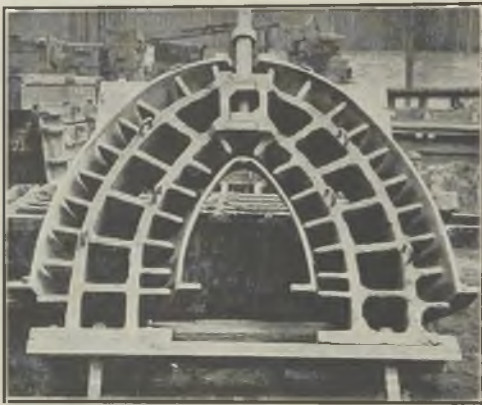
CORE IRON USED FOR THE CASTING SHOWN IN FIG. 19.
